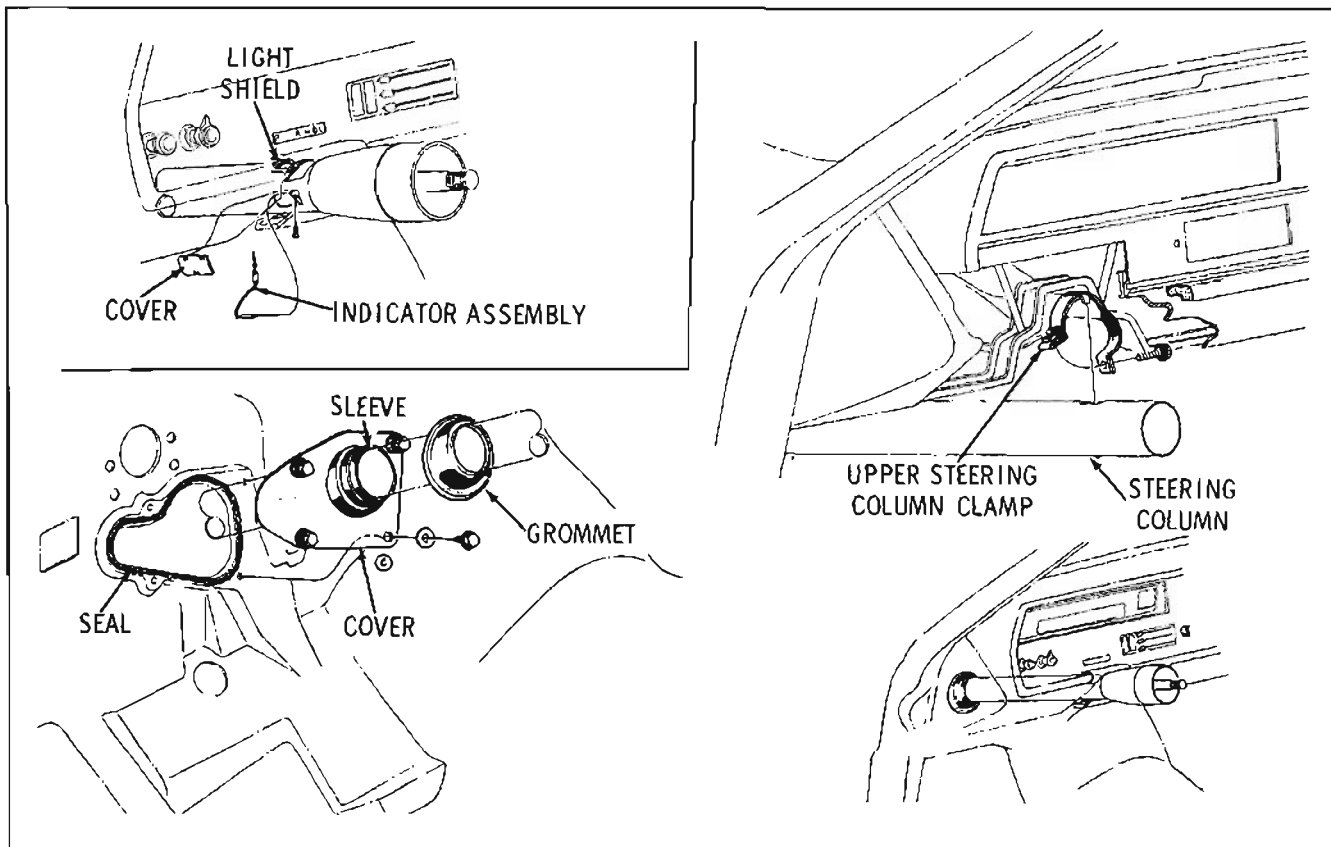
Steering Column Installation (30 - 31 & 32 Series)
